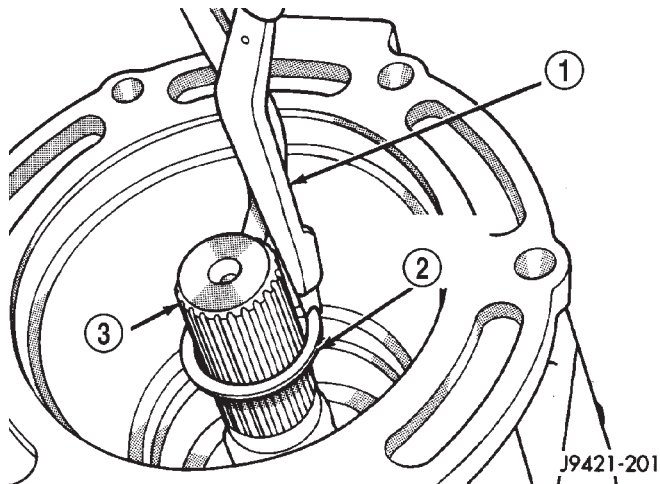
Rear Bearing Snap Ring Removal—4WD
